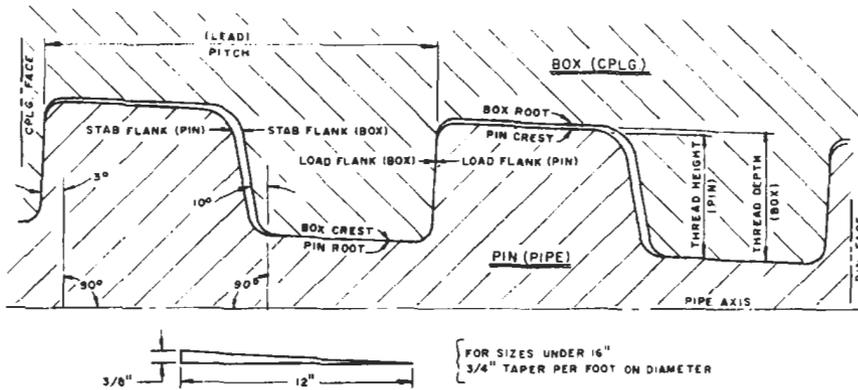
Buttress thread configuration for 13³/₈-in. outside diameter and smaller casing. (From Ref. [154].)
